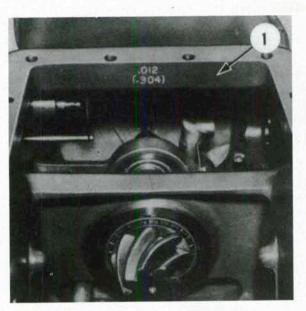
Normal shim thickness for pinion mesh adjustment is 0.041 inch (1.04 mm). If other than this thickness is required, it is indicated by stamping on rear axle center housing (1) or on pinion shaft (4—Fig. 233).
